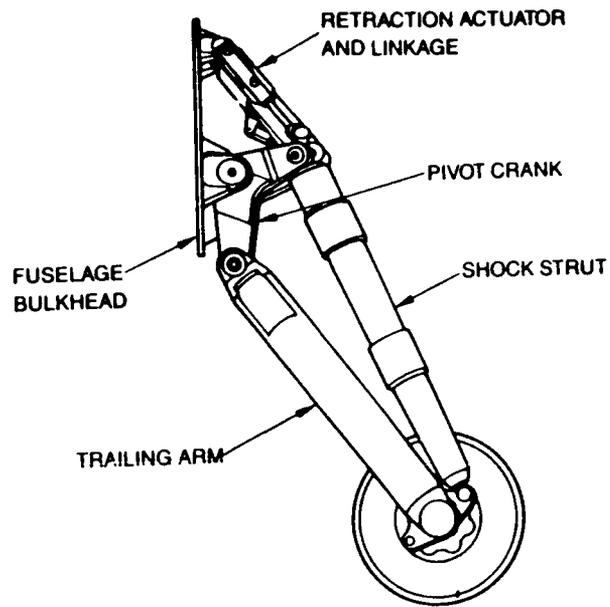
Schematic view of the pivot crank showing position in the landing gear assembly.
